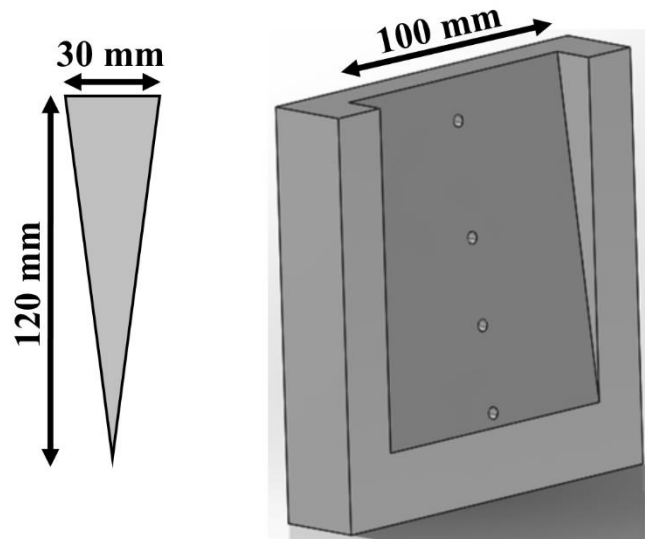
Schematic drawings of the wedge casting and permanent mold. Wedge profile (left) and the modified permanent mold (right).
